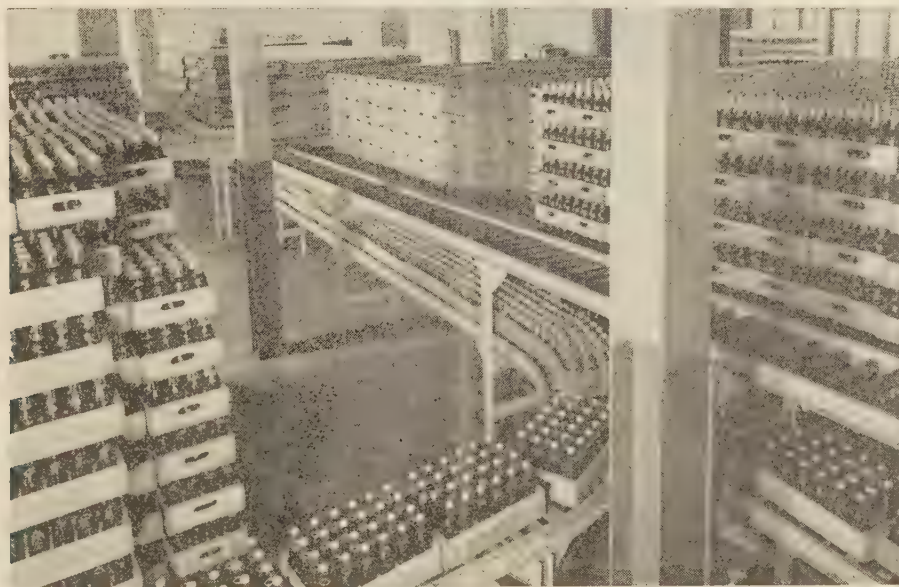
TYPICAL ROLLER CONVEYER IN BOTTLING HOUSE
